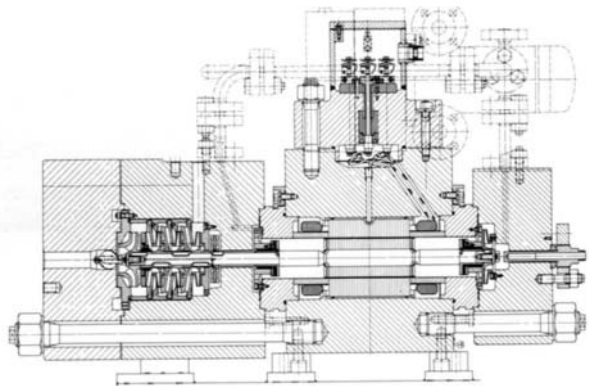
High-pressure canned-motor centrifugal pump with hydrodynamic shaft seal
